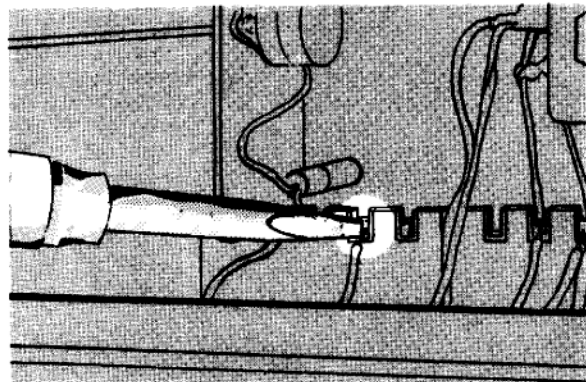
Correct method of applying heat in soldering to a ceramic strip.
